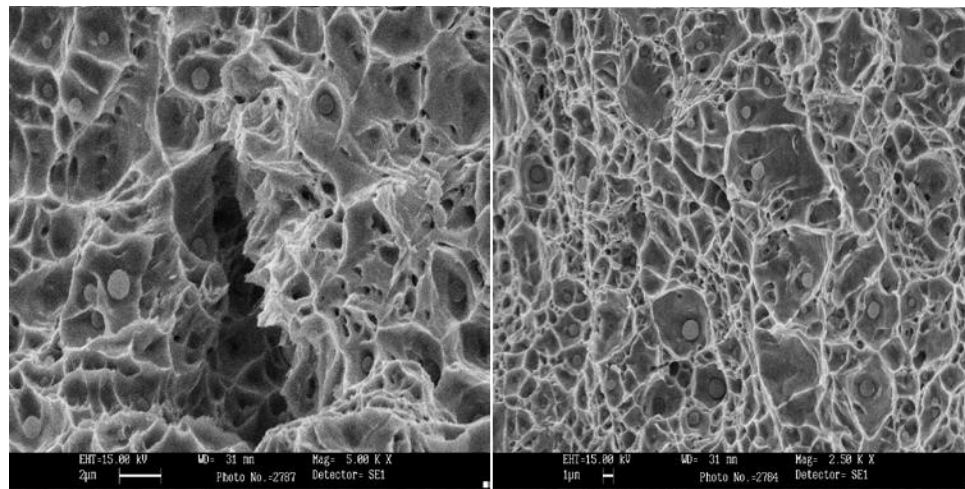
SEM photograph of weld metal fractured surface of tensile specimen before thermal shock at (a) 2500× (b) 5000×
